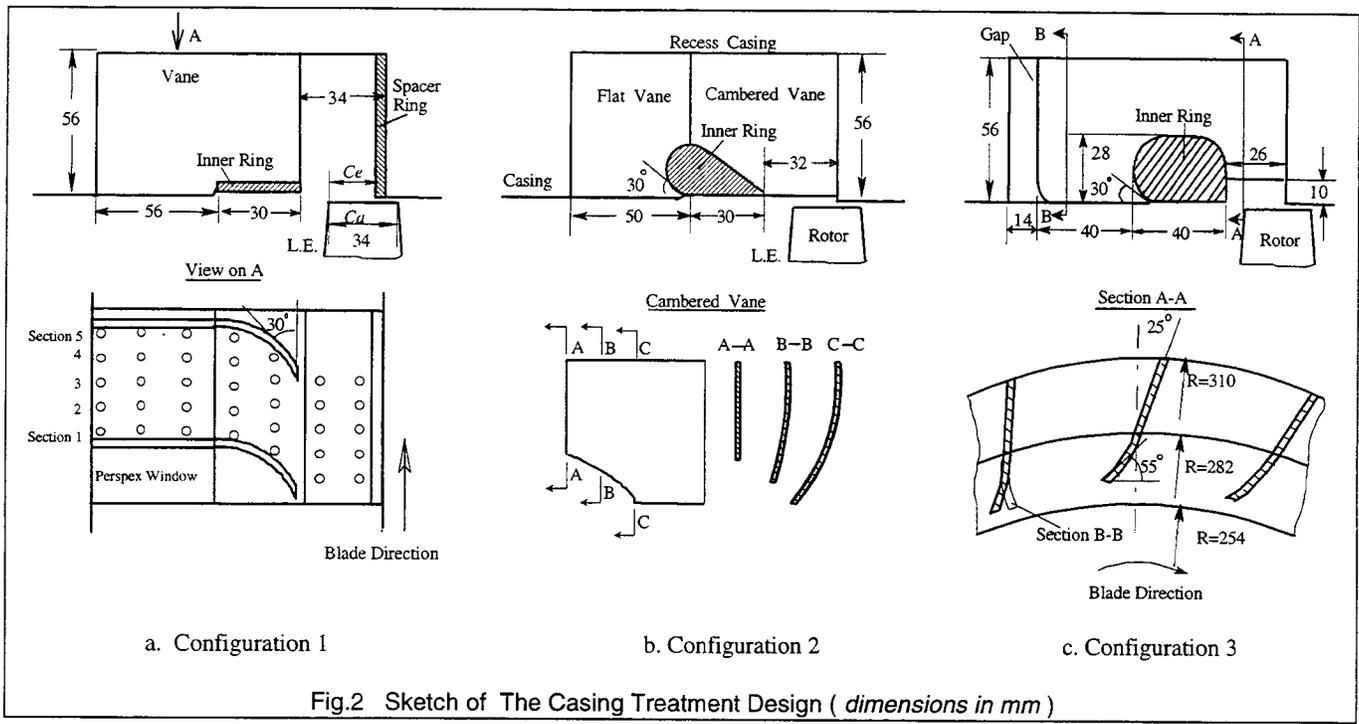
Sketch of The Casing Treatment Design (dimensions in mm)
